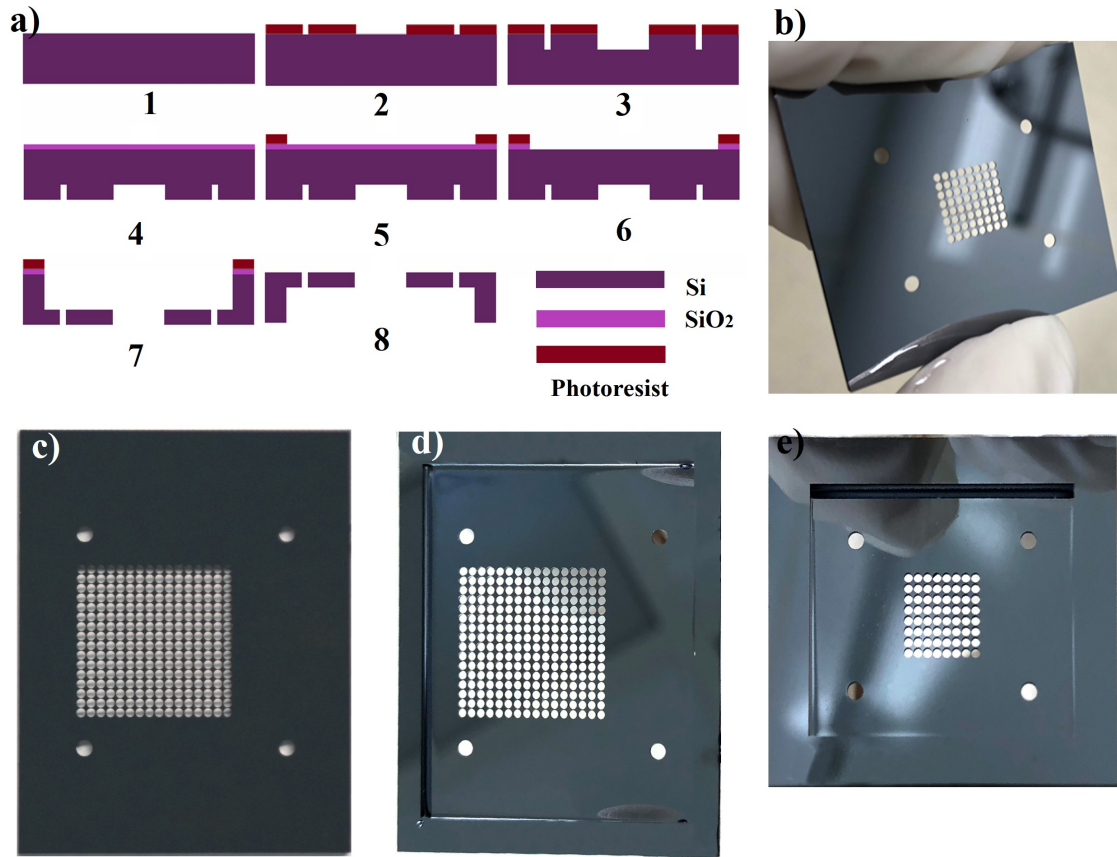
a. Schematic of the fabrication of the extractor electrode. b and e) top and back side view of the extractor for a 64 emitter electrospray source. c-d) top and back side view of the extractor for a 256 emitter electrospray source.
